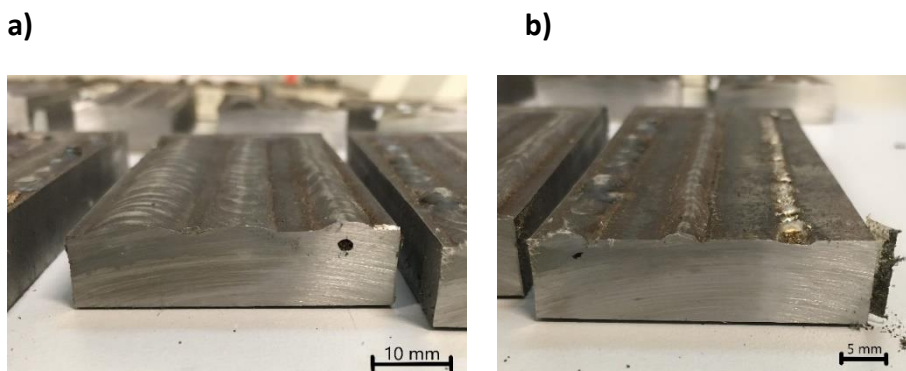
Cross-section of weld beads with 10.4g/min powder feed rate and a welding current of: a) 100 to 300mm/min, b) 400 to 600mm/min
